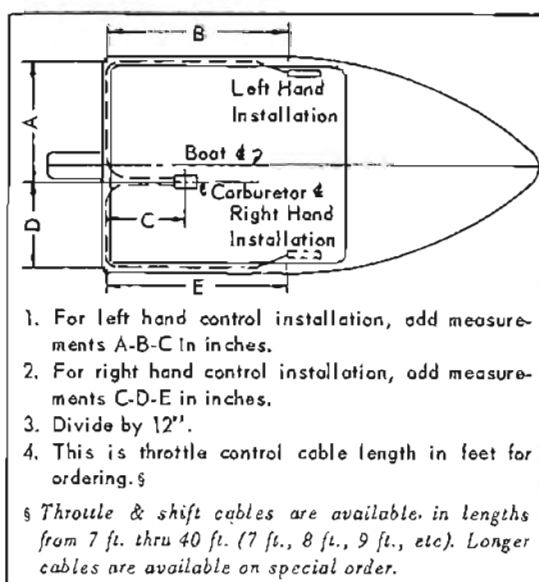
MerCruiser "190" & "225" Marine Engine Throttle Cable
